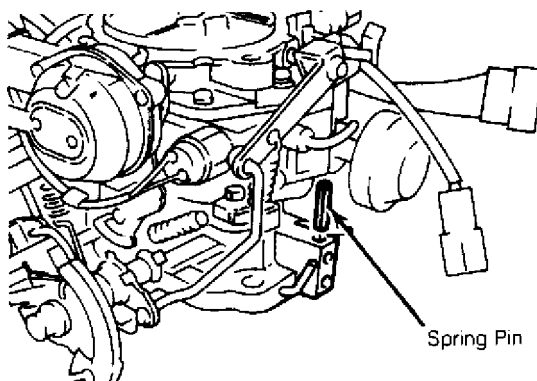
Removing Carburetor Mixture Screw Roll Pin (B2200 Carbureted)
